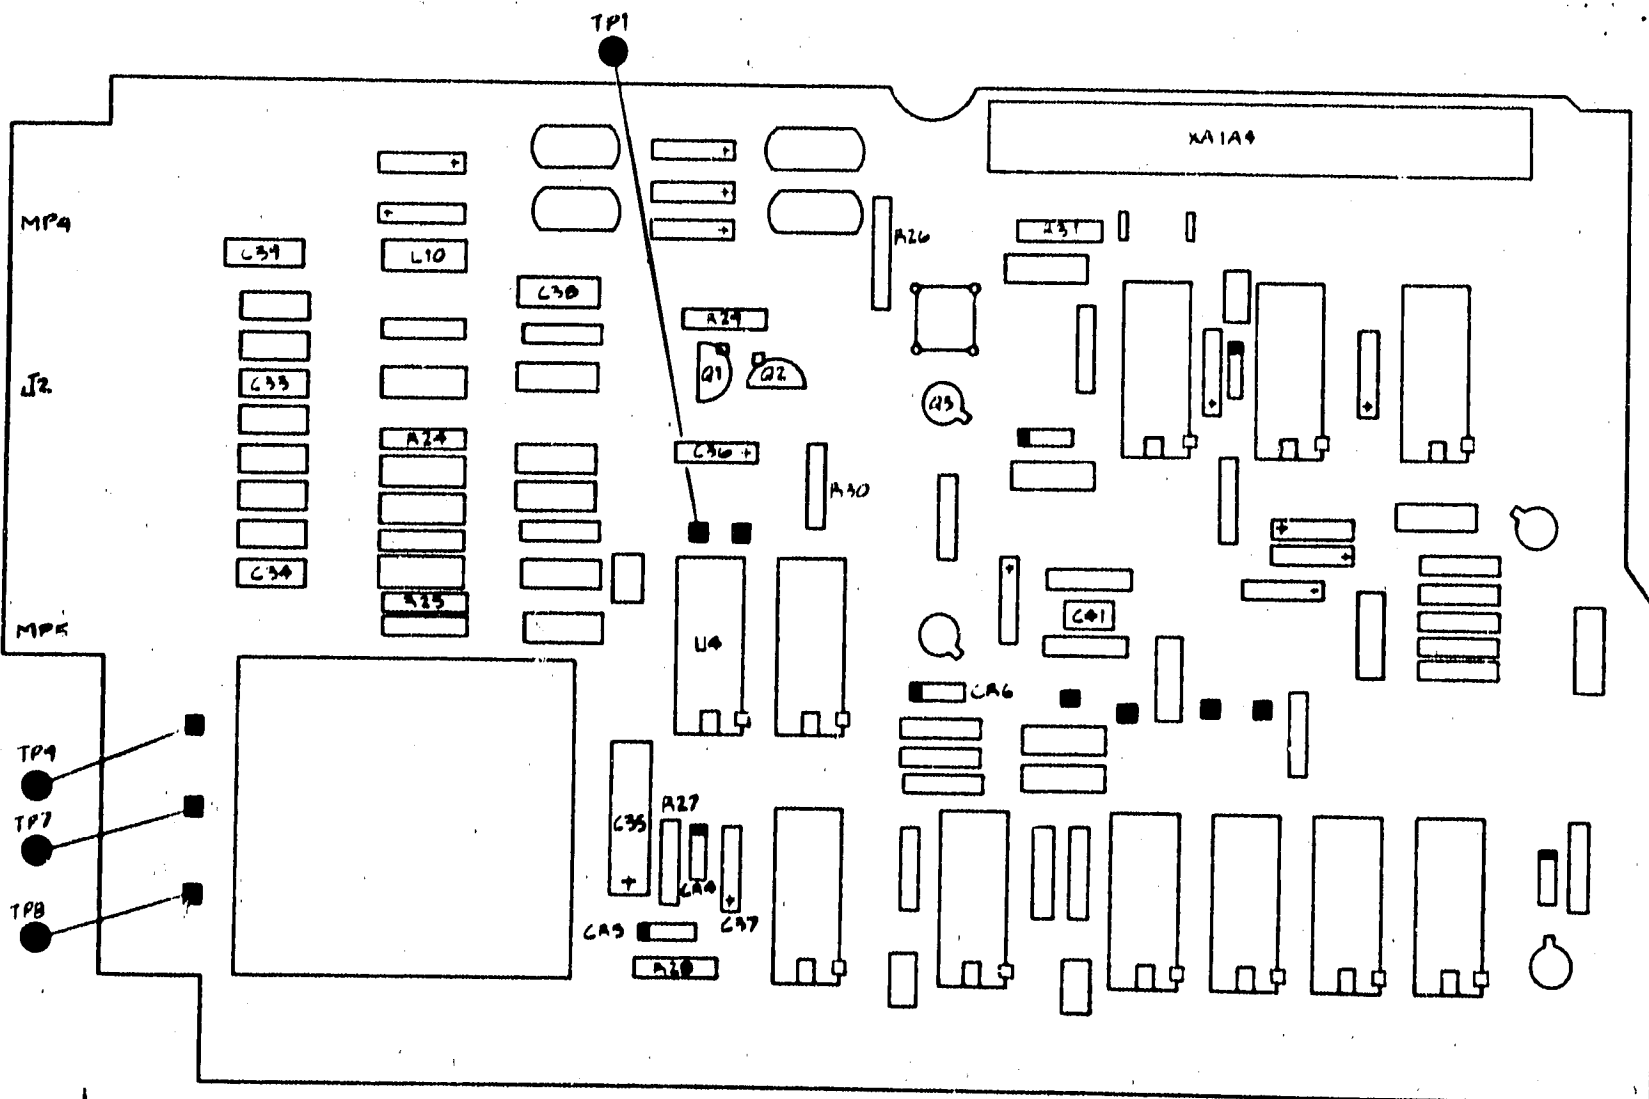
P/O A1A3 Time Base Board Assembly (Low-Pass Filter) Component Locations
